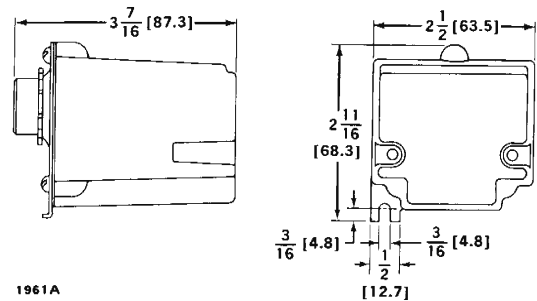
R4225/R8225 installation dimensions in in. (mm).
